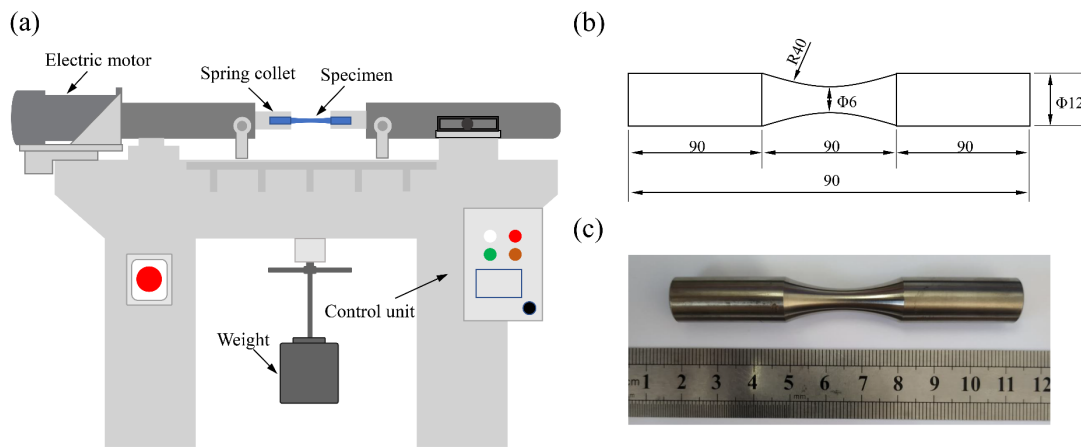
(a) Schematic diagram of rotating bending fatigue equipment; (b) Specimen geometry; (c) Image of the specimen.
